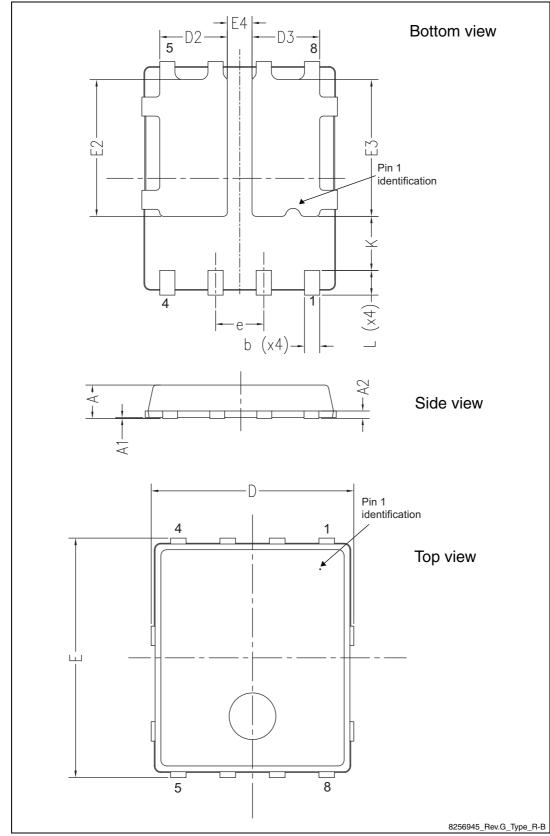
PowerFLAT™ 5x6 - double island type R-B drawing
